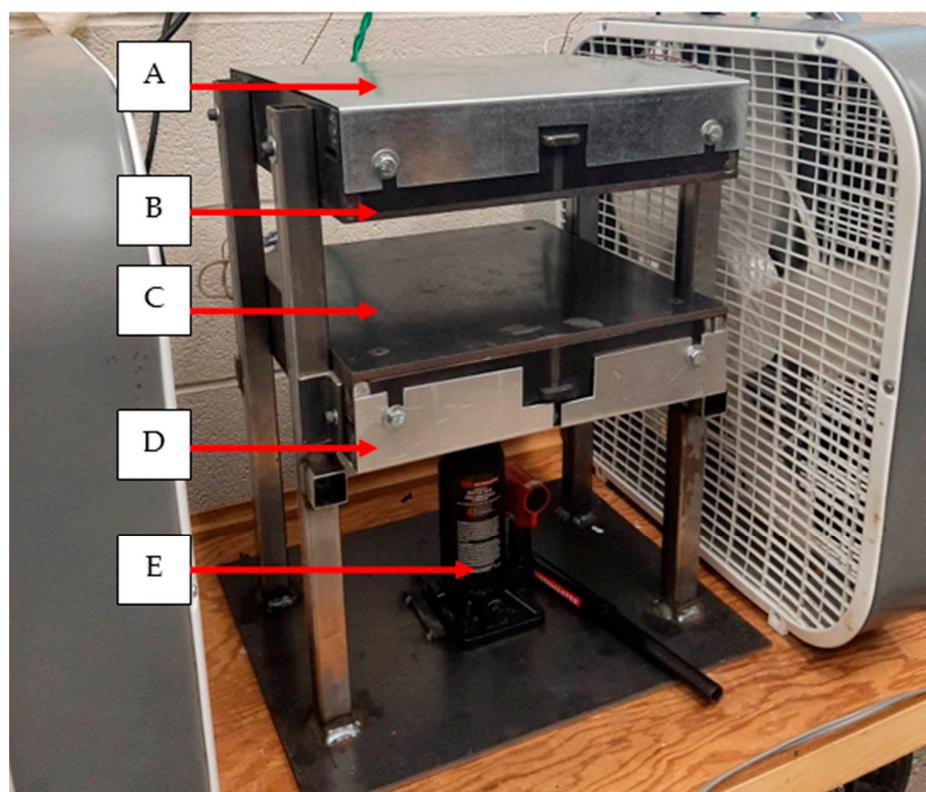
Open-source scientific hot press used for manufacturing all samples. (A) Fixed upper plate insulated subassembly and heater enclosure. (B) Fixed upper pressing plate work surface. (C) Adjustable lower pressing plate work surface. (D) Adjustable lower plate insulated subassembly and heater enclosure. (E) A 4-ton bottle jack for vertical actuation.
